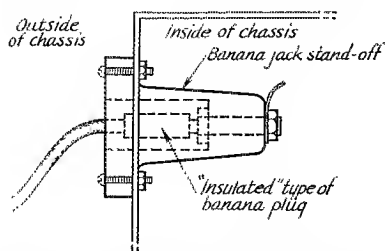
NOVEL METHOD OF MOUNTING JACK-TOP INSULATOR TO AVOID EXPOSING "LIVE" PARTS
